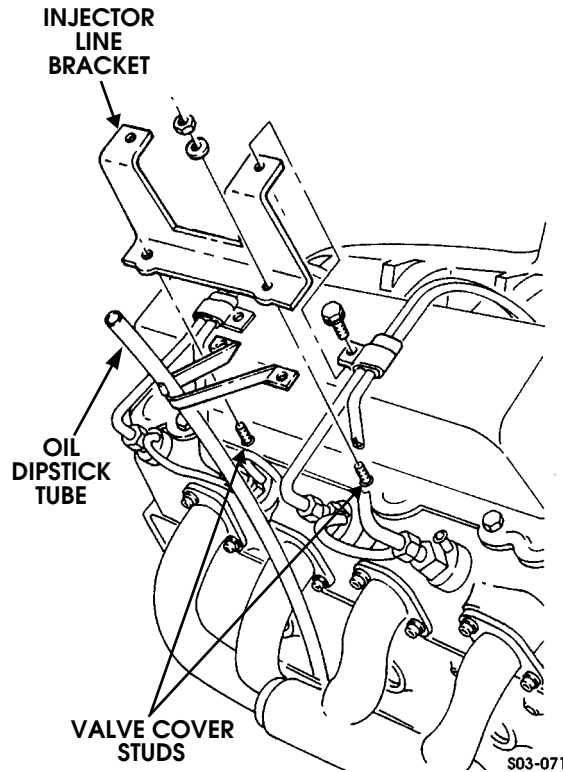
Injection Line Bracket Removal/Installation (Driver-Side)
